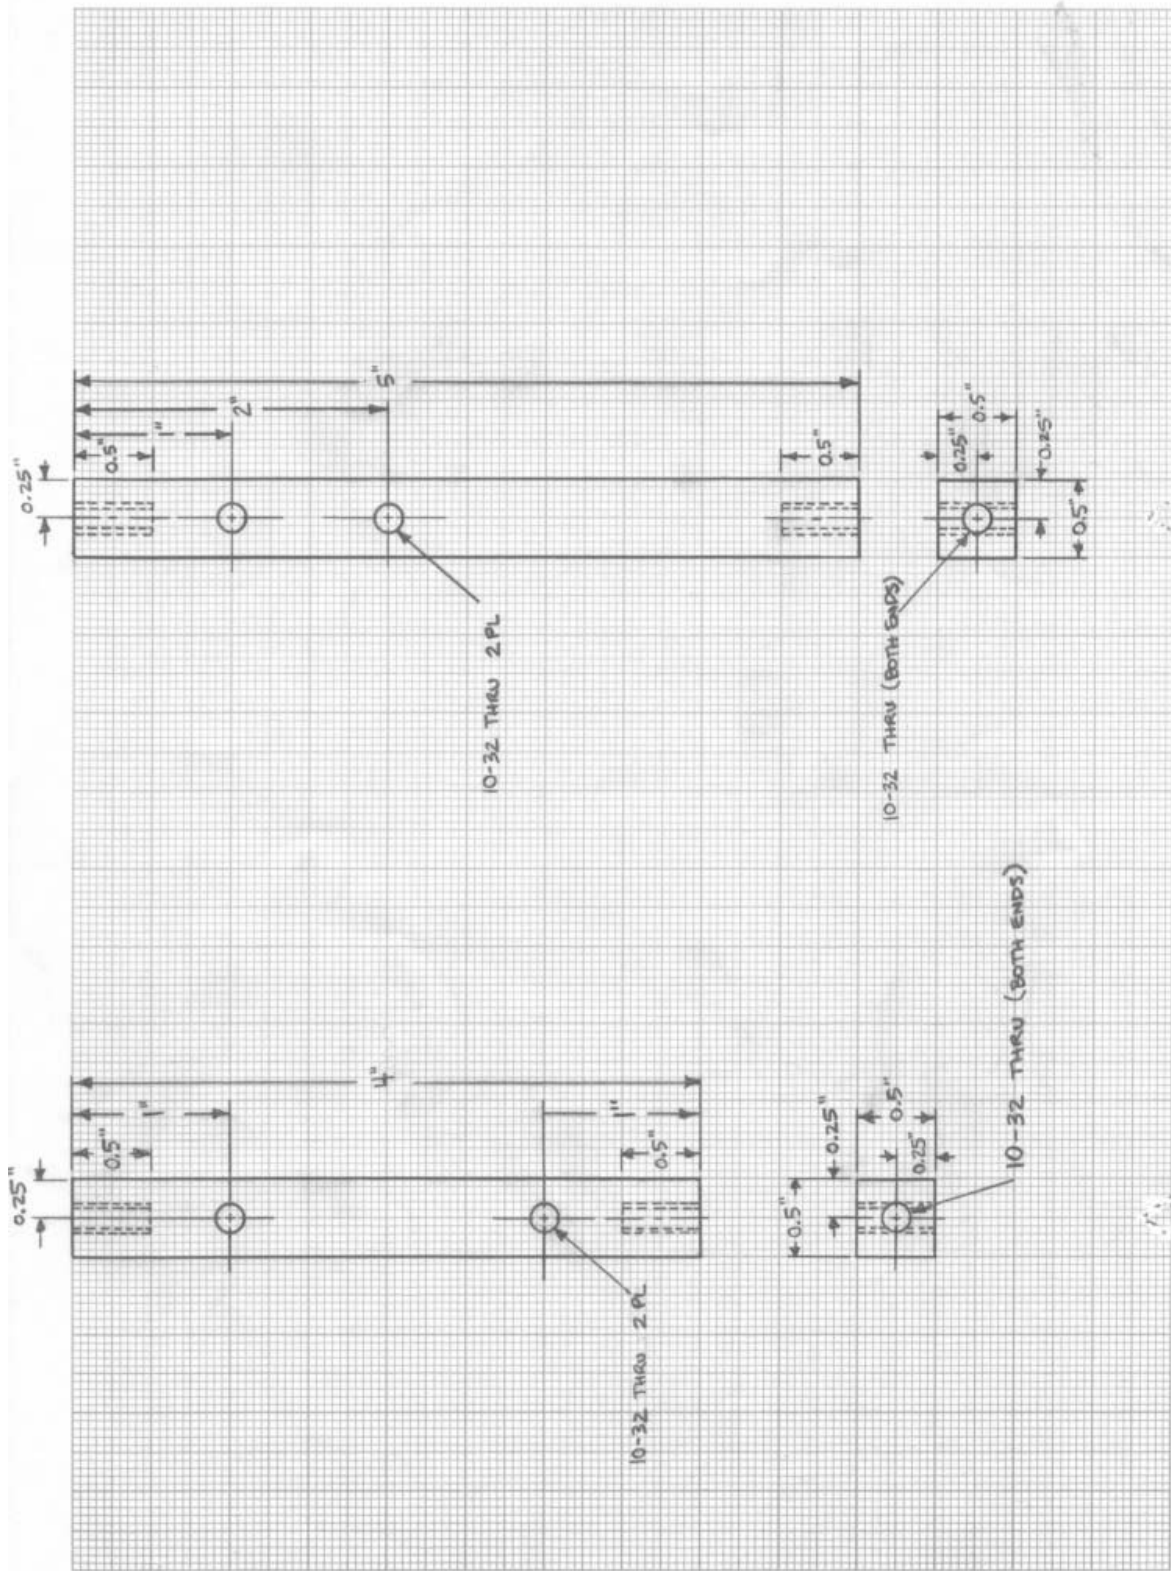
Joint Motor Housing Standoffs (Shoulder, short; Elbow/Wrist, long)
